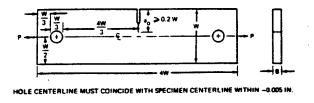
Single Edge Notch Tensile (SENT) Specimen.
